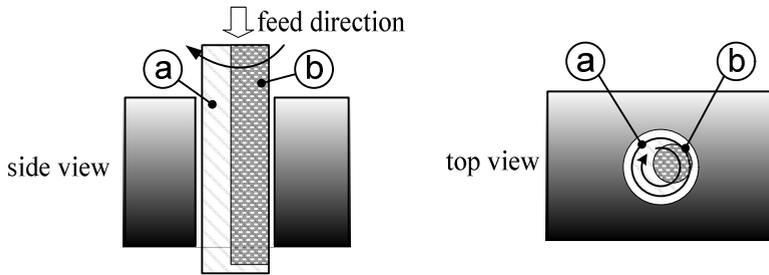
machining bores of the same diameter with different tools: a) large tool diameter with no planetary movement, b) small tool diameter and planetary movement
